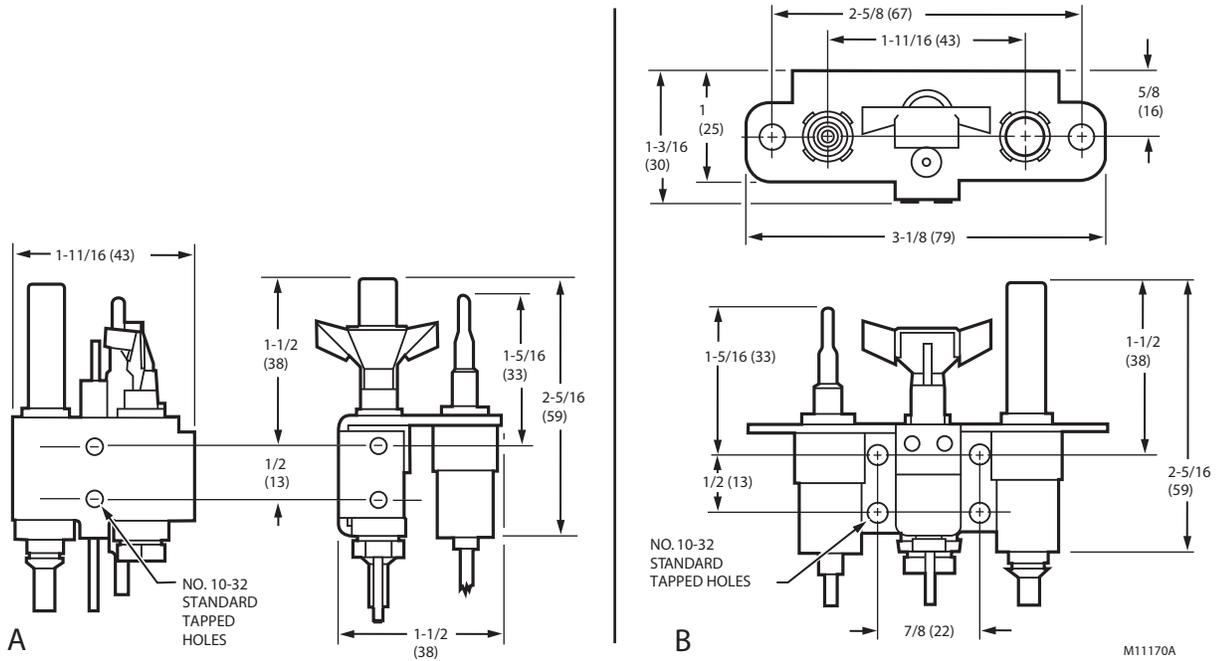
Q382 mounting brackets and dimensions in in. (mm)
